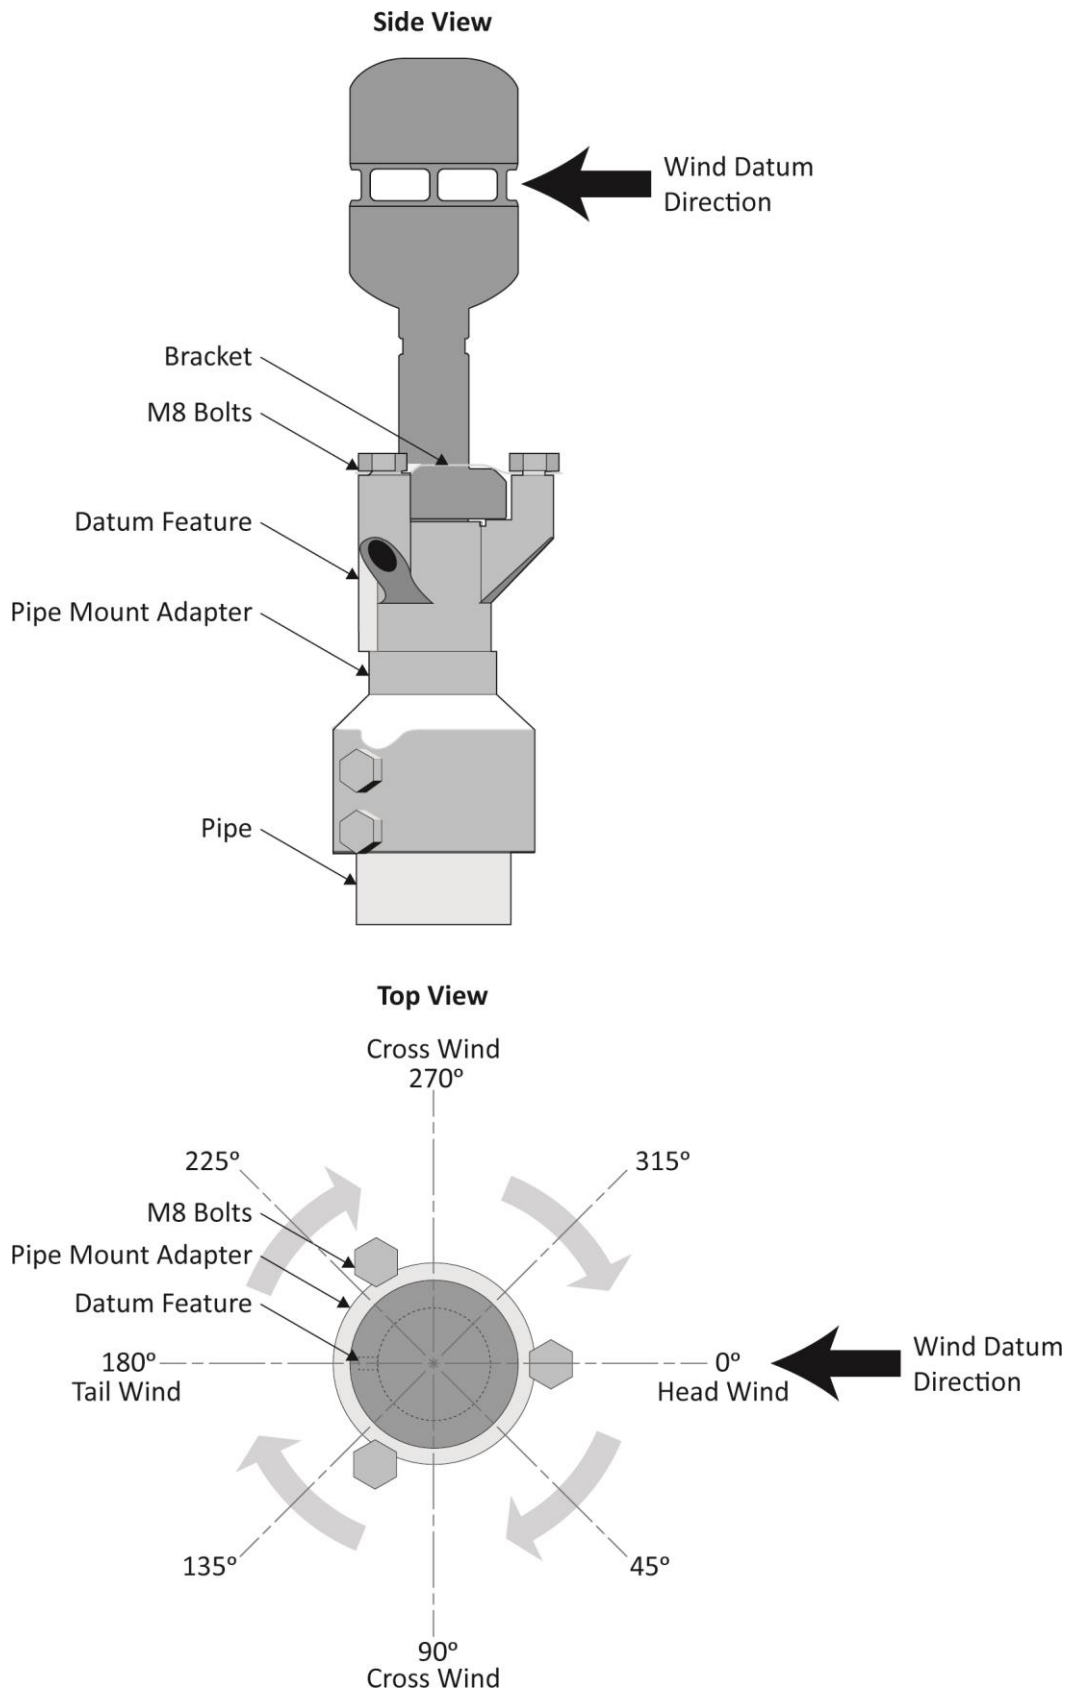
Pipe Mount Wind Sensor with Adapter (all dimensions in mm)
